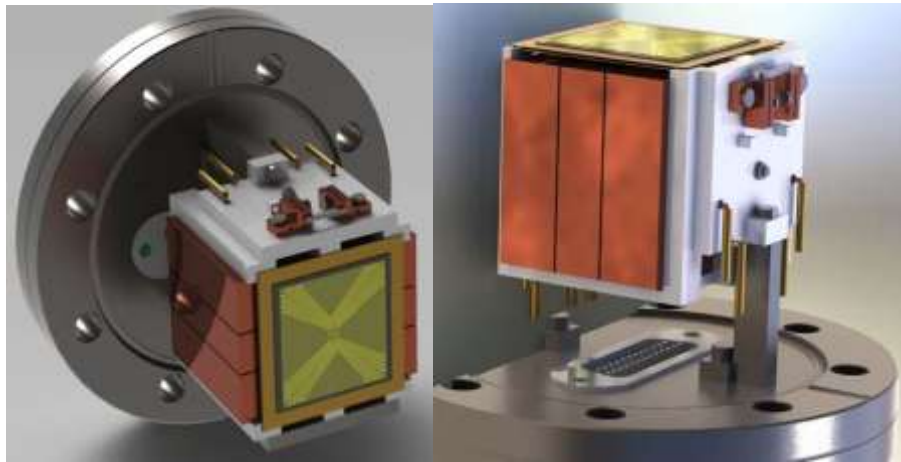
Left, CAD drawing showing overall layout of the atom chip with the microstructured chip-PCB. Right: scheme of the microstrucutred chip-PCB
